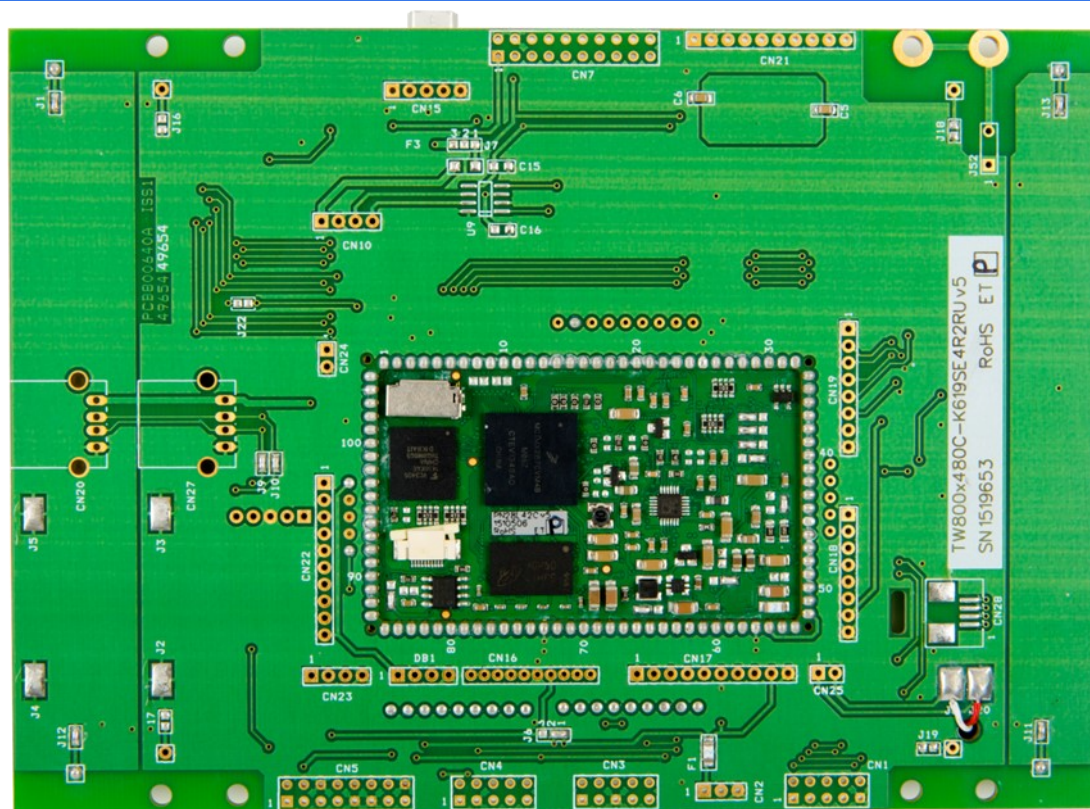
TW800x480C- K619SE4R2RU Rear View
